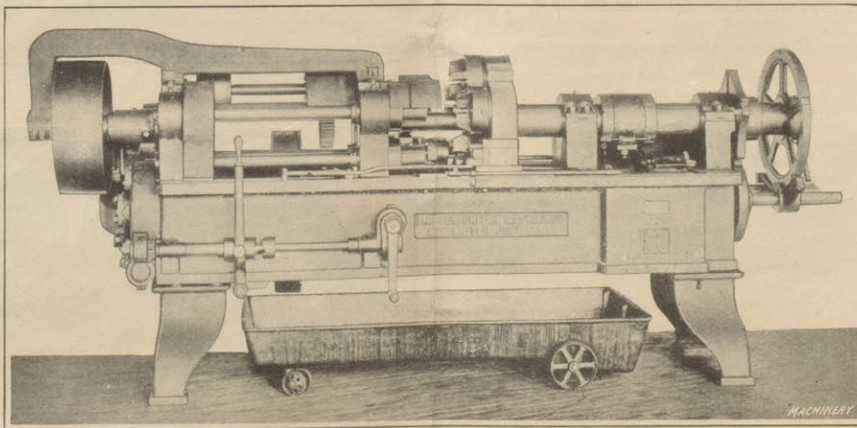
New Britain No. 24 Automatic Chucking Machine set up on Fuse Parts
